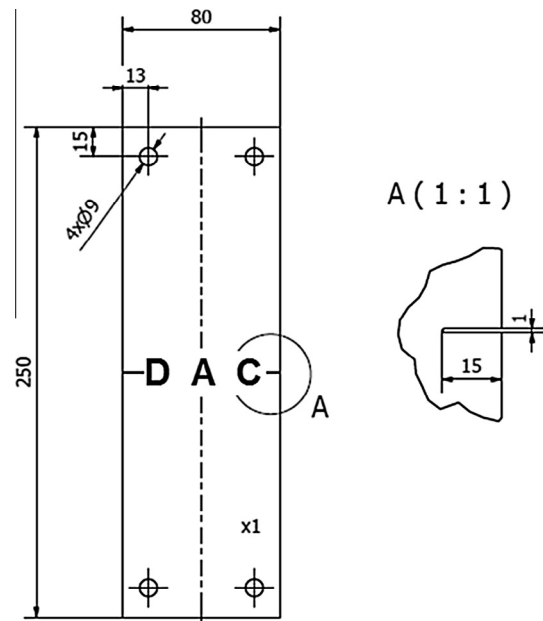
The geometry of fatigue specimens with the D, A, C points indicating measurement locations.
